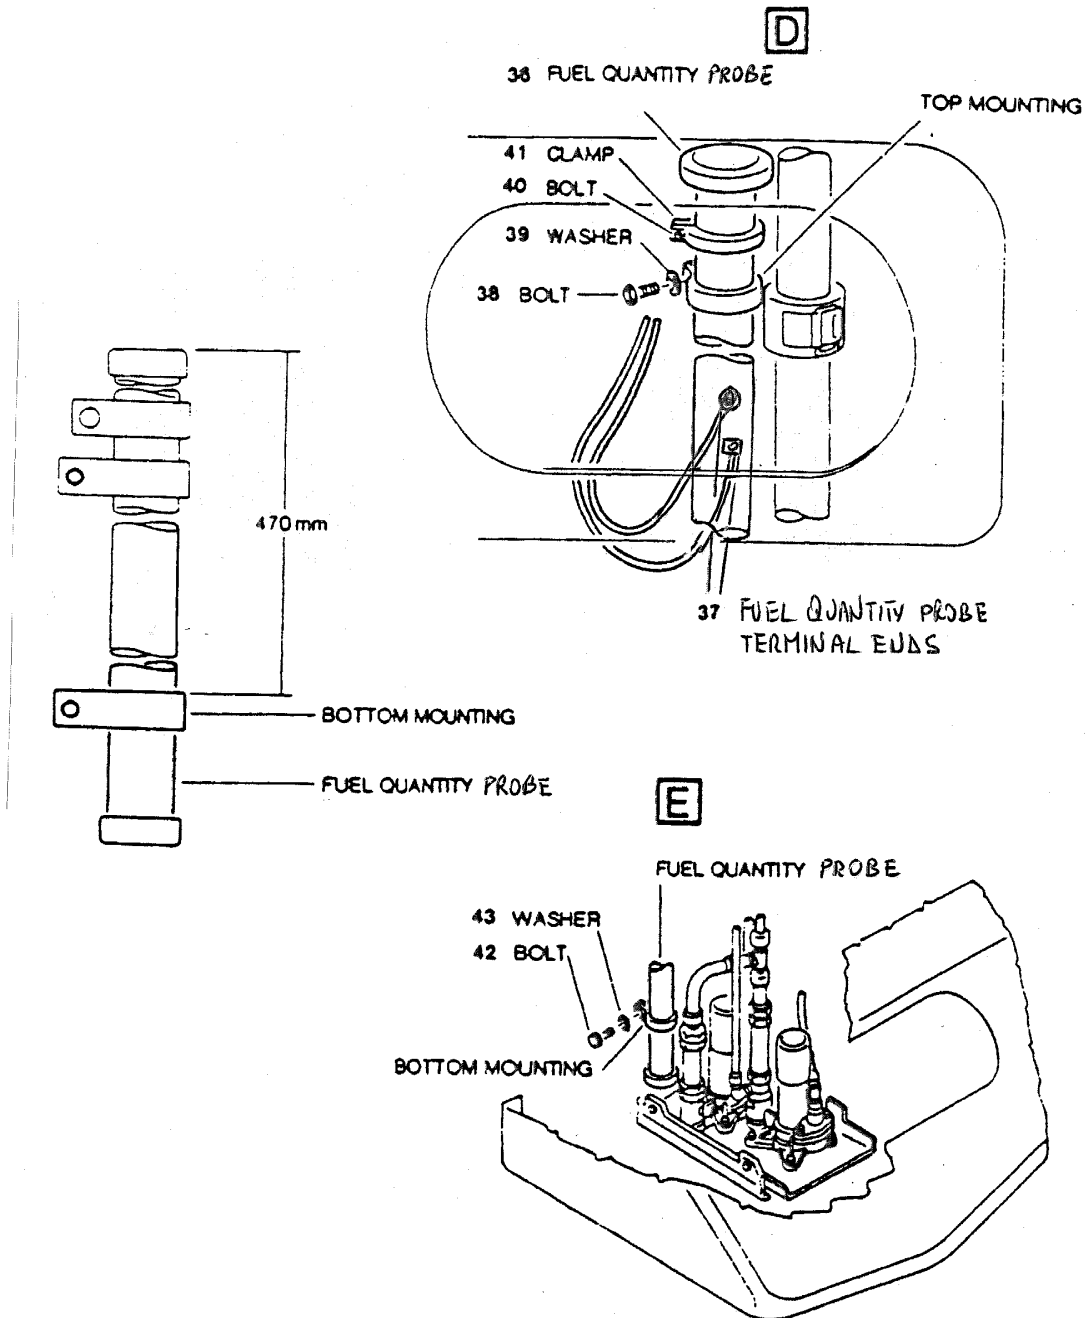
(Sheet 3) - Collector Tank Probe - Removal /Installation
